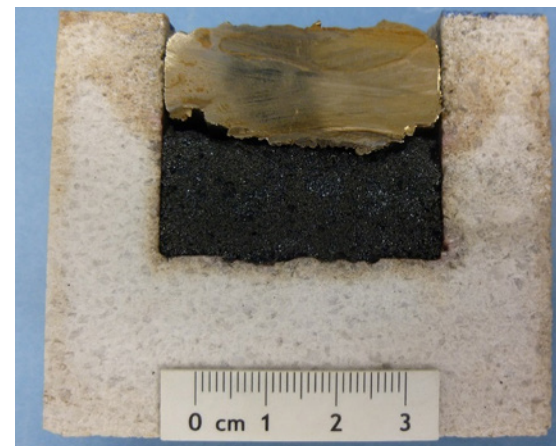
Crucible test 3 - new type of ladle well filler and Steel 2 (Picture: Purmetall)
